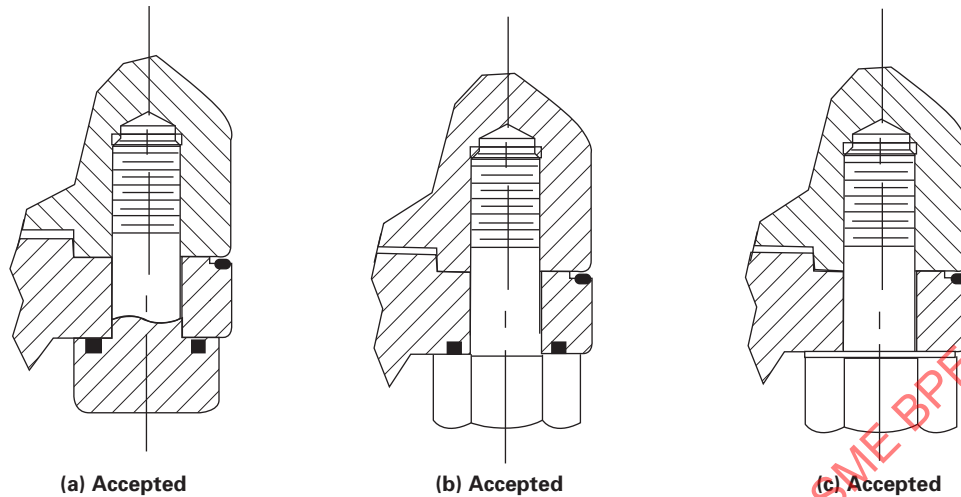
Fastener Seal ArrangementsAlternate Bolting Designs
